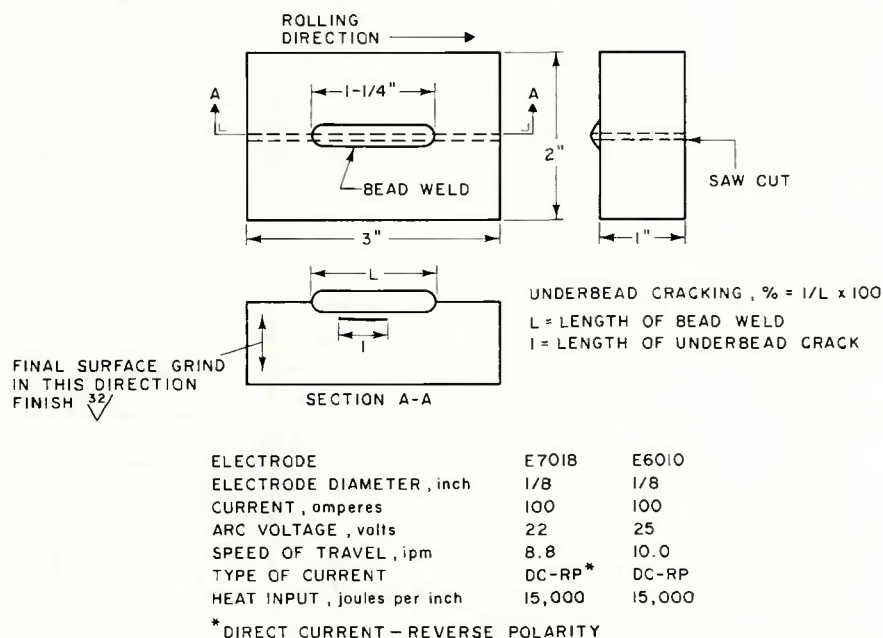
Preparation of underbead cracking specimen and conditions used for welding 1 in. thick plates
